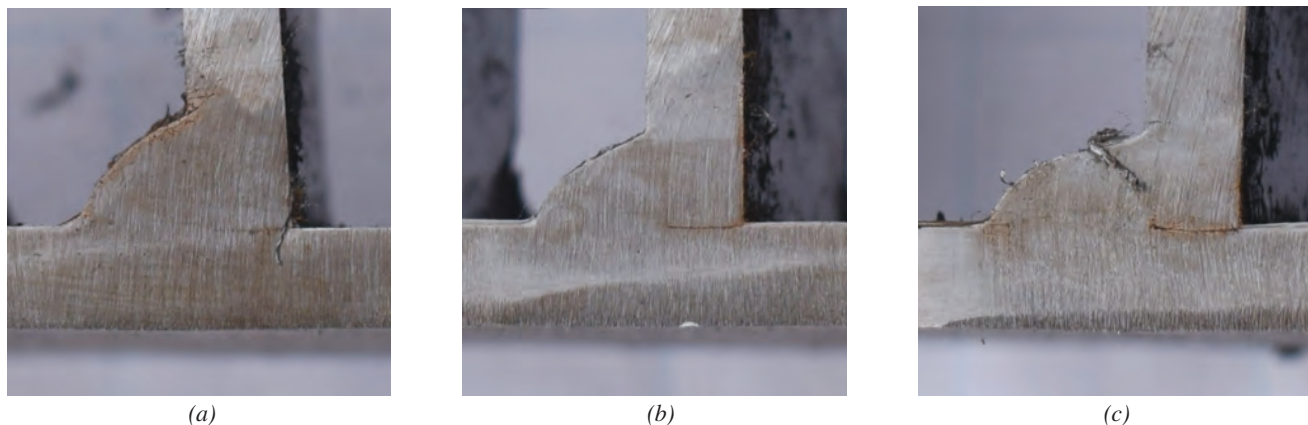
Fillet weld specimens—position C: (a) location 5; (b) location 6; (c) location 7.
